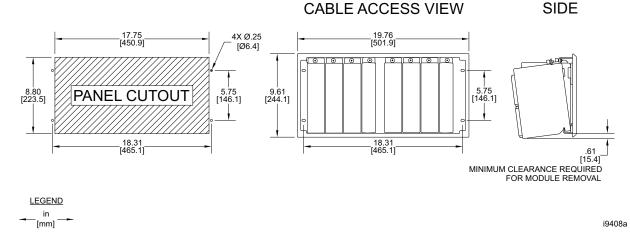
SEL-2240 Dimensions for Dual 4-Slot Panel-Mount Chassis
